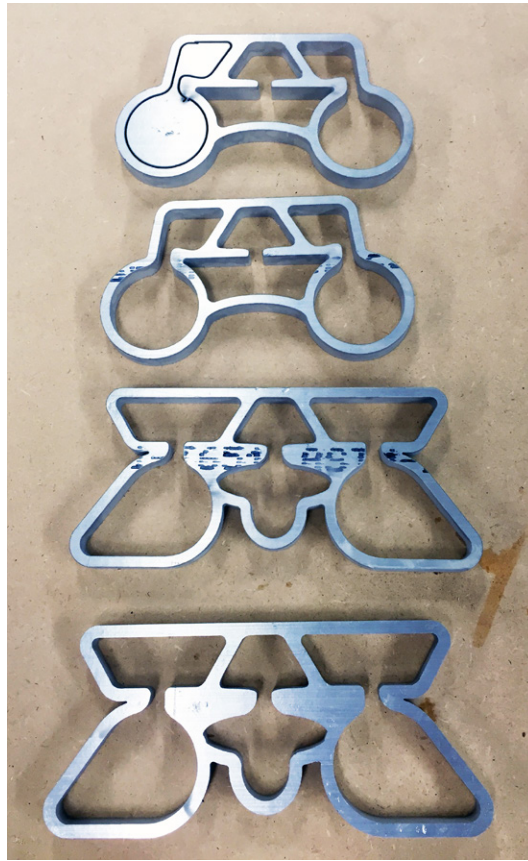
Image of the dies cut using a water jet cutter prior to being welded
